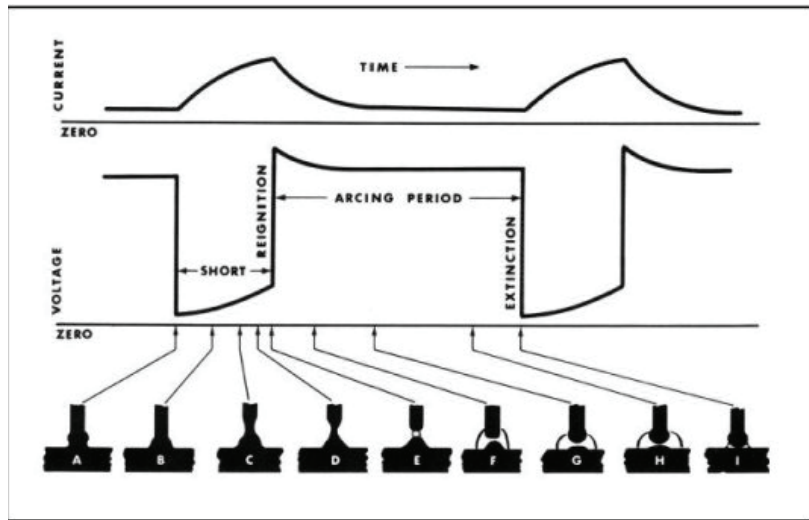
Phases of the short circuit welding arc (source:[2])
